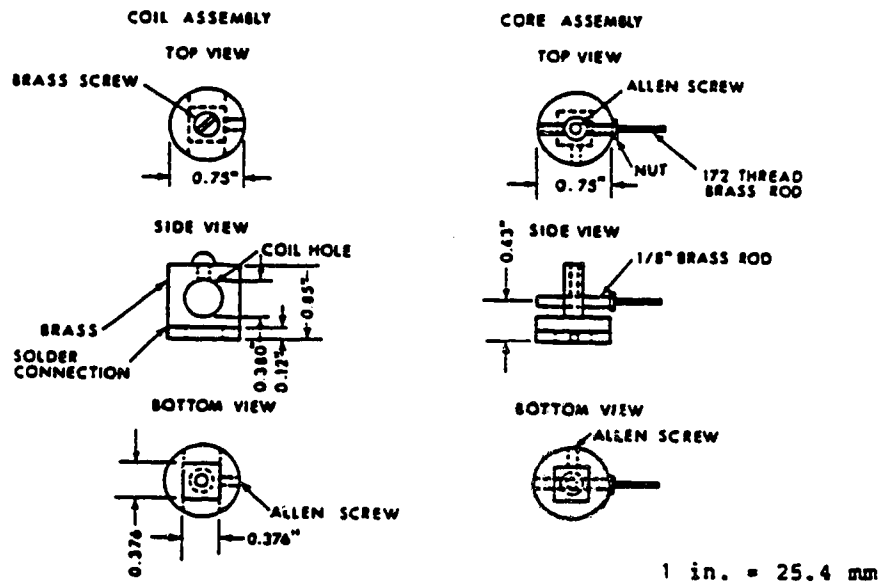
DISPLACEMENT GAUGE CORE AND COIL ASSEMBLIES
